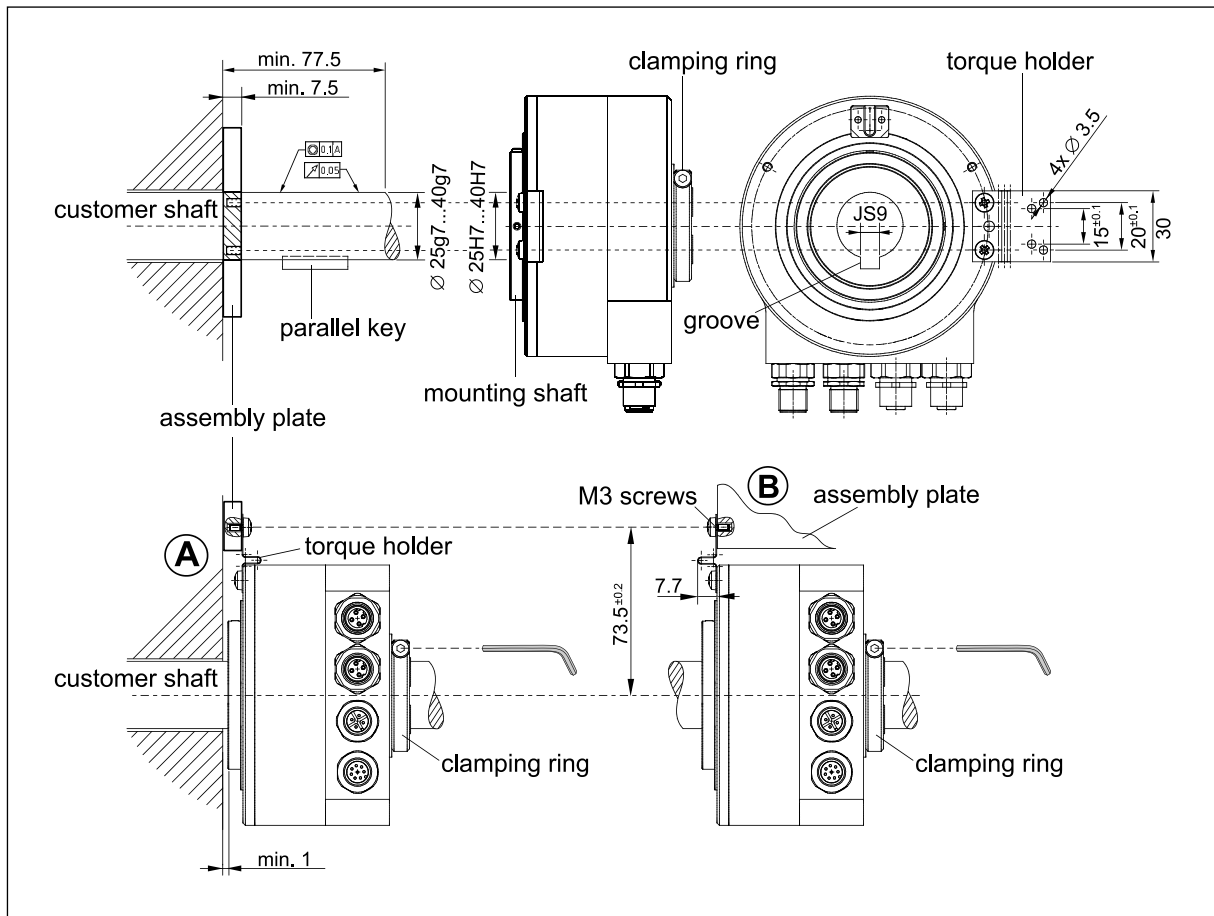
Type with torque holder (sheet-metal spring) with  $\varnothing 25H7...40H7$
